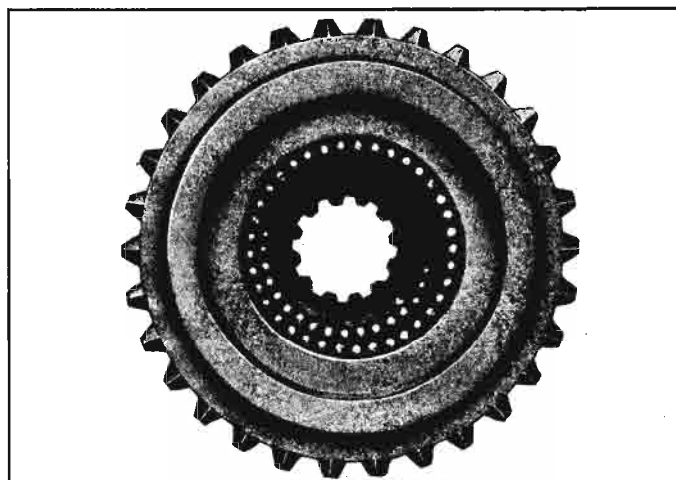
D-46—Clutch Gear Roller Bearings Installed
